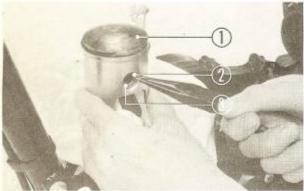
① Piston ② Piston pin clip ⑤ Piston pin
